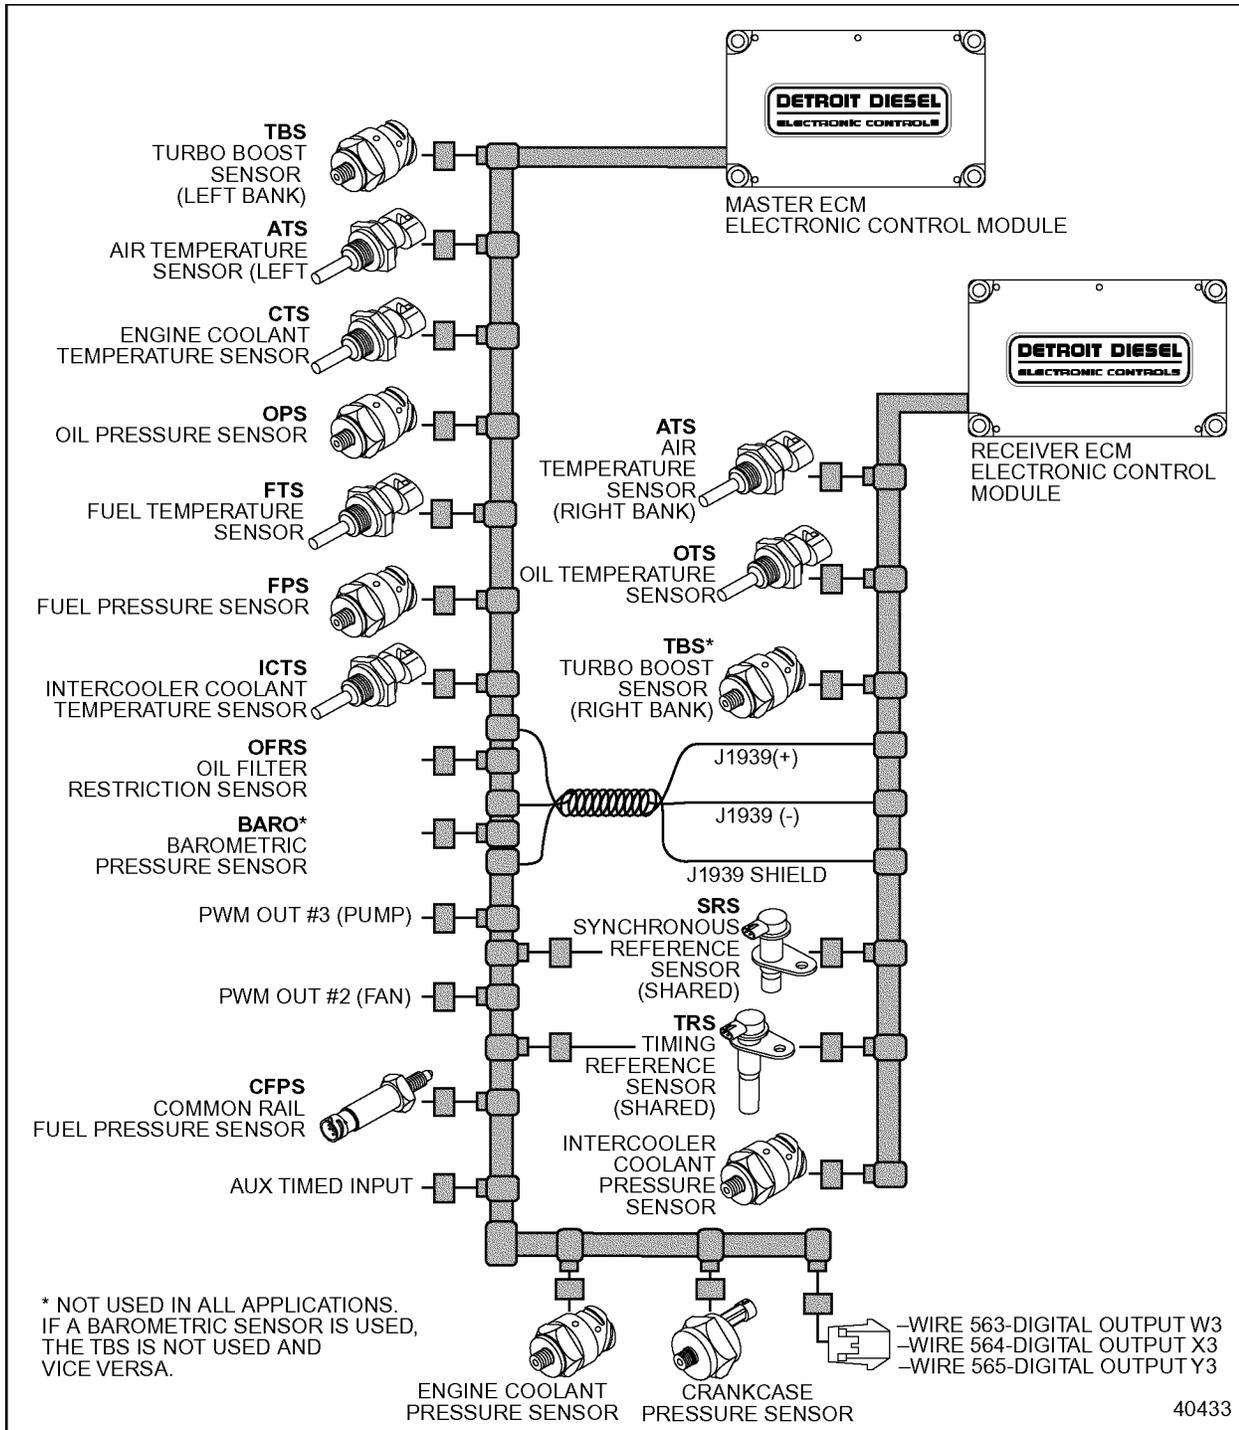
A Typical Series 4000 Multi-ECM Engine Sensor Harness
